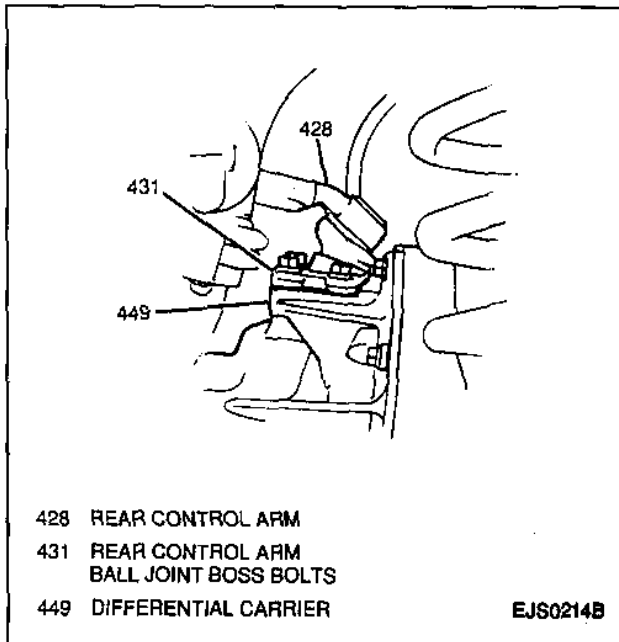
Removing Rear Control Arm Joint Boss Bolts
